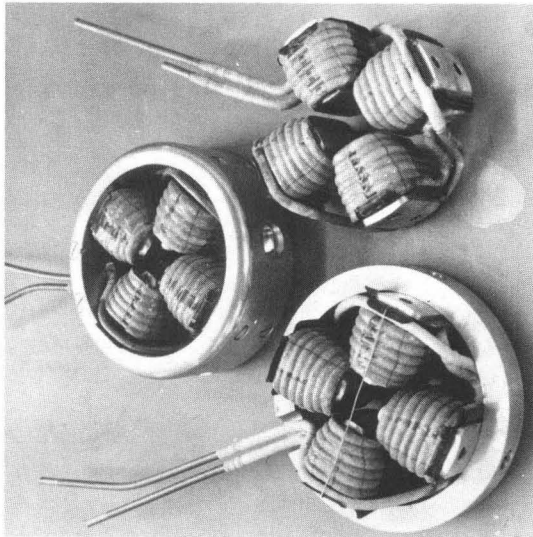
Wideröe "outer" drift tube quadrupole prototype
